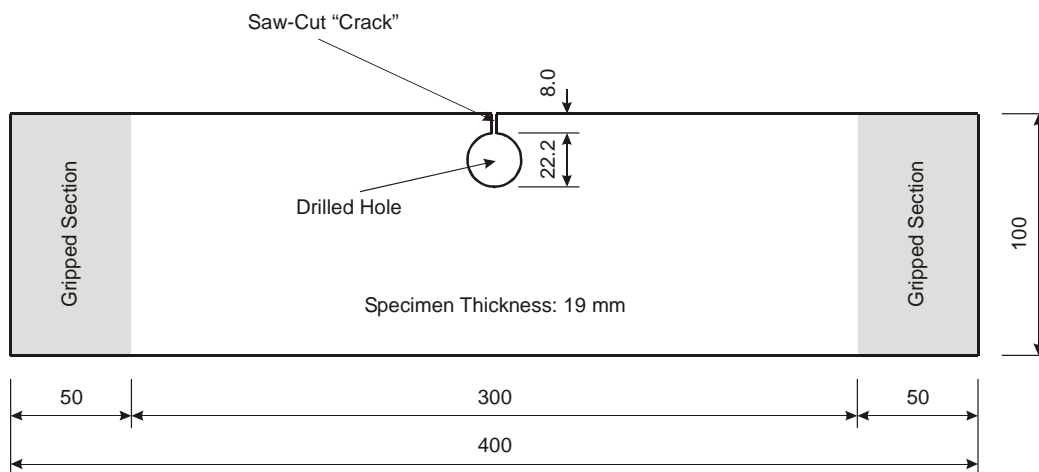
Specimen with hole-drilling repair tested by Wang [2010], in mm.
